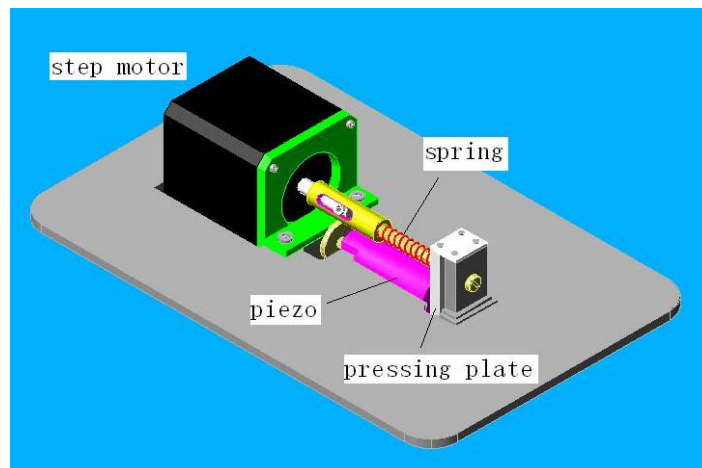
Three-dimensional view of the homemade pressing device.
